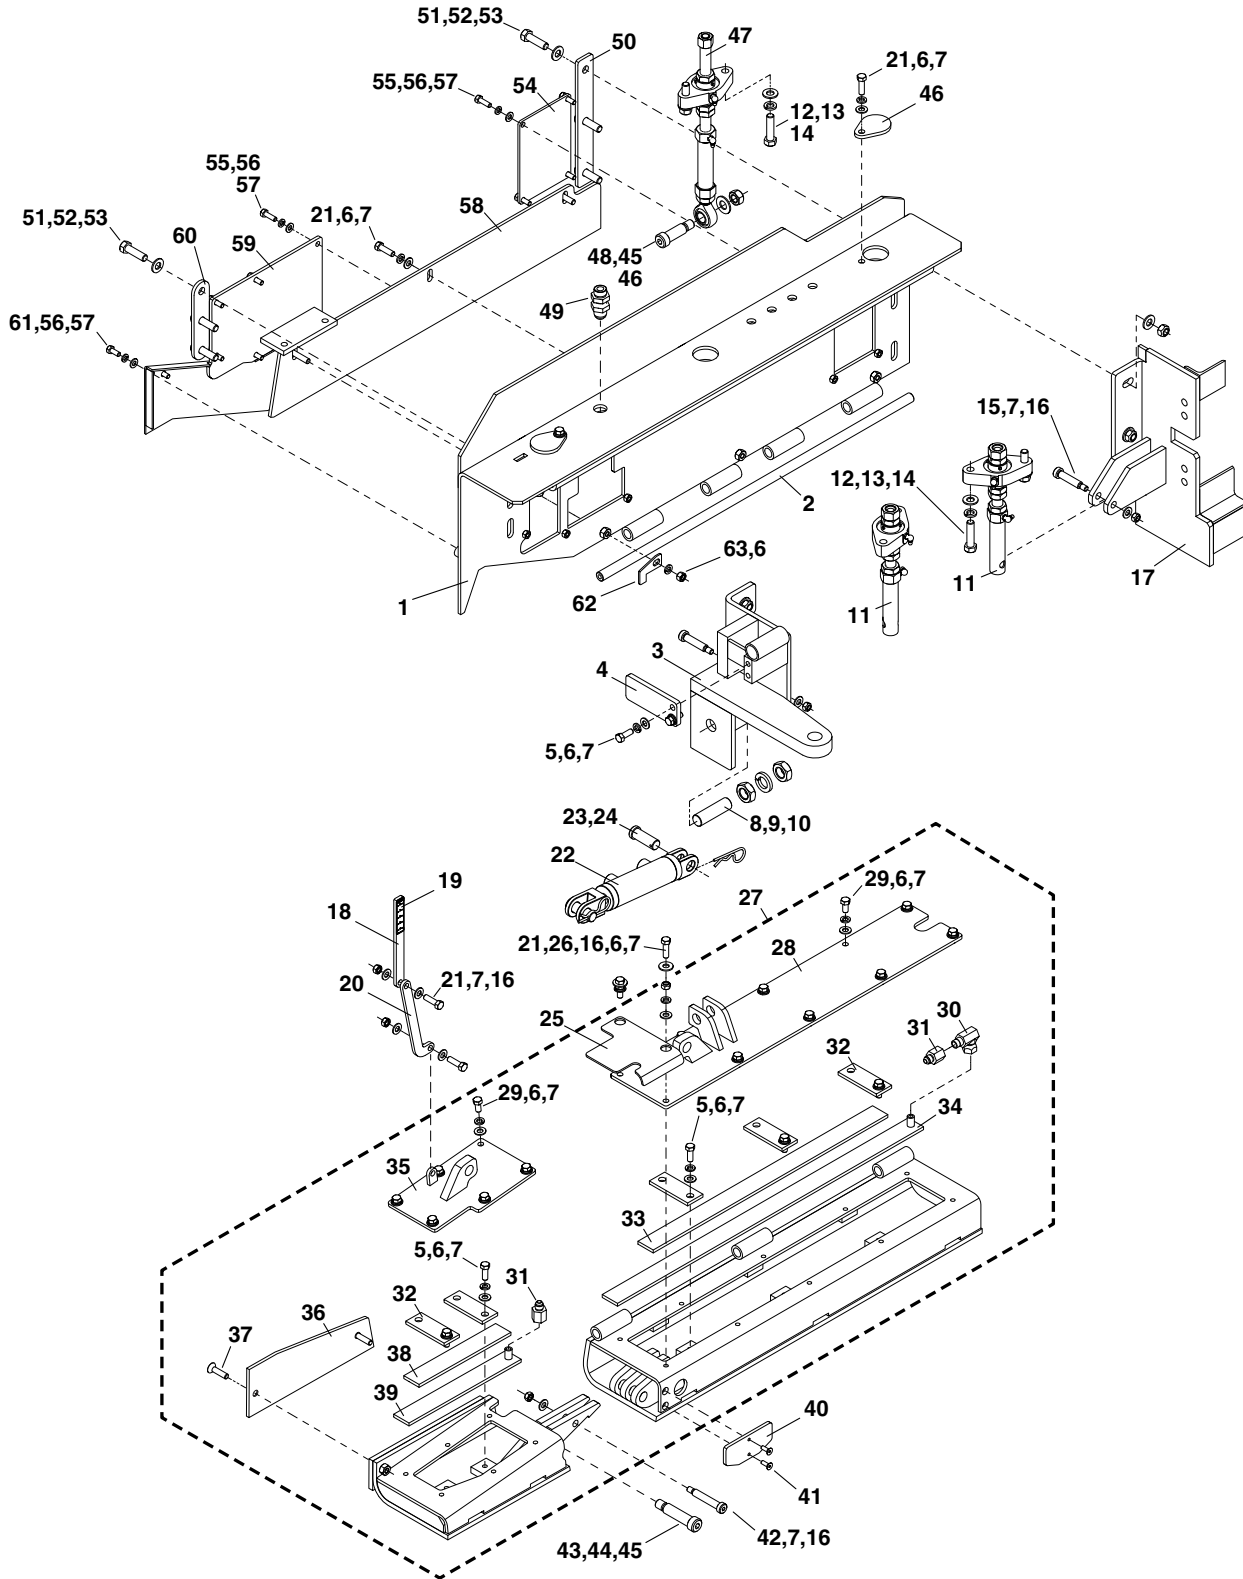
Option - HD Berm Screed Extension Assembly - Left (1 of 2)
